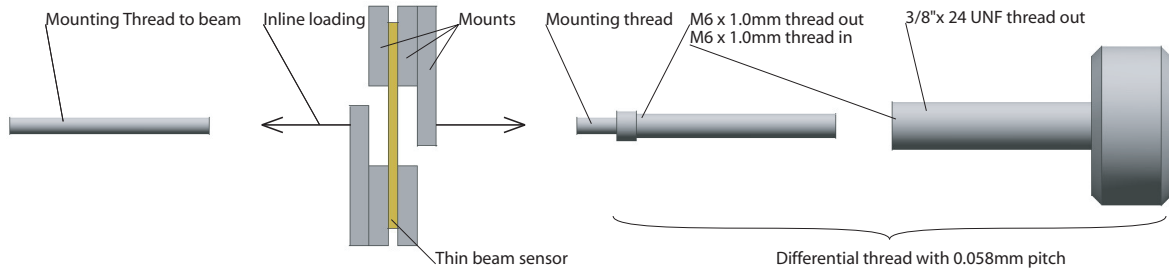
Exploded view of the TBS force sensor and the mounts
